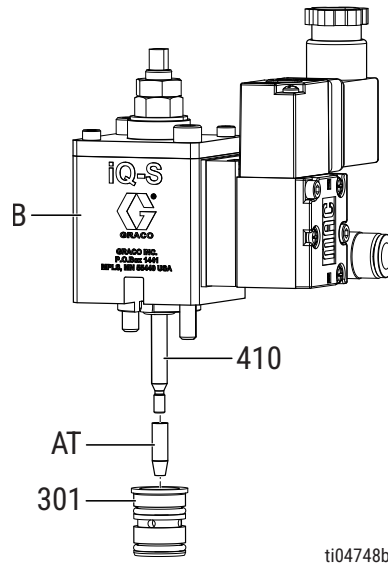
Install Seal Kit, Snuff Back Dispense Valve
